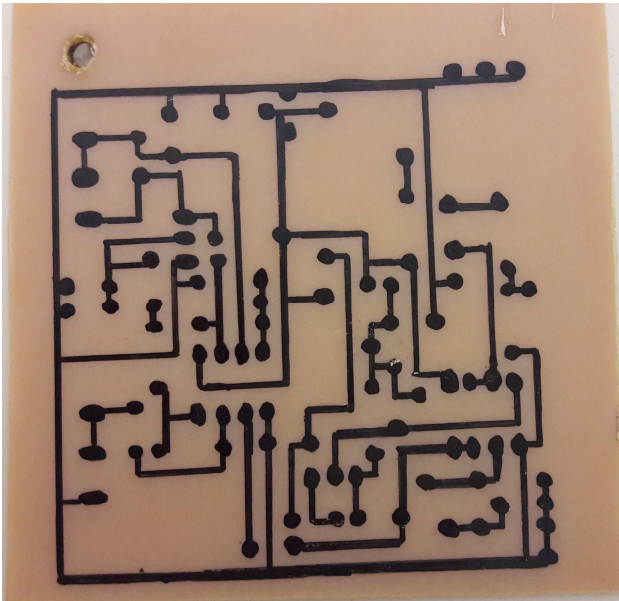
Mask of PCB-I after corrosion   Figure 6.2 – Mask of PCB-I ready to input
